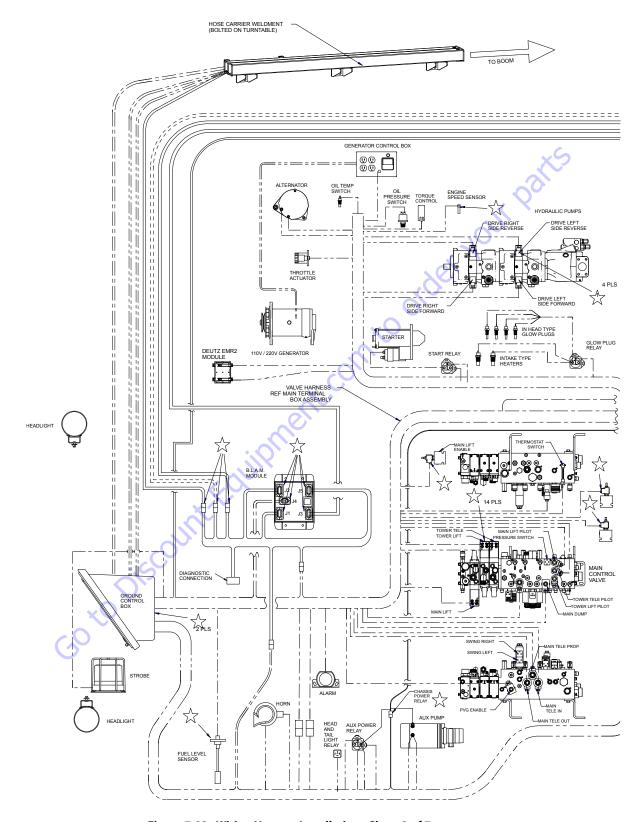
Wiring Harness Installation - Sheet 3 of 7
